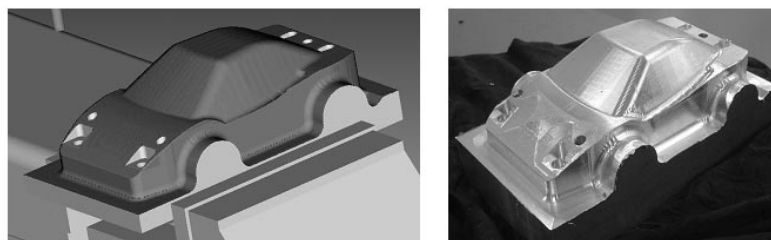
Machining process simulation using Vericut and final machined mould (body car of new car 2).
